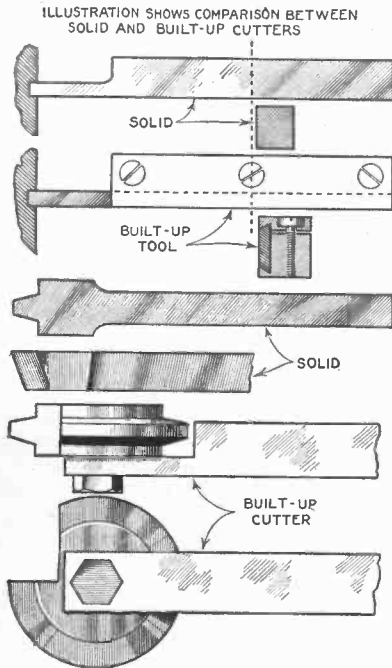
Tools fashioned completely of tool steel are expensive; why not make your own cutting implements, using a carbon steel shank, and tool steel for the point?
